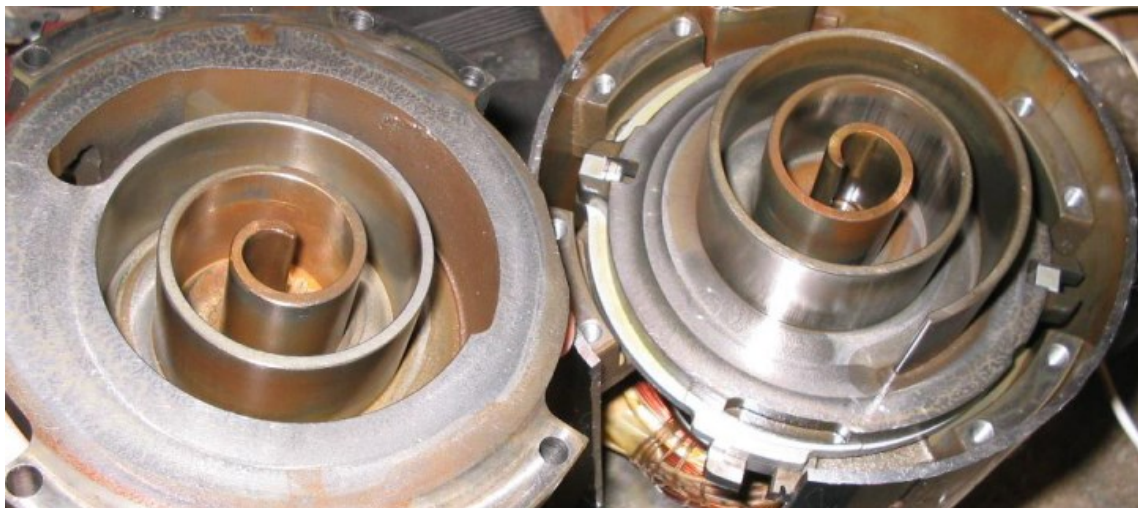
Details of the machined fixed and orbiting scrolls²⁶
